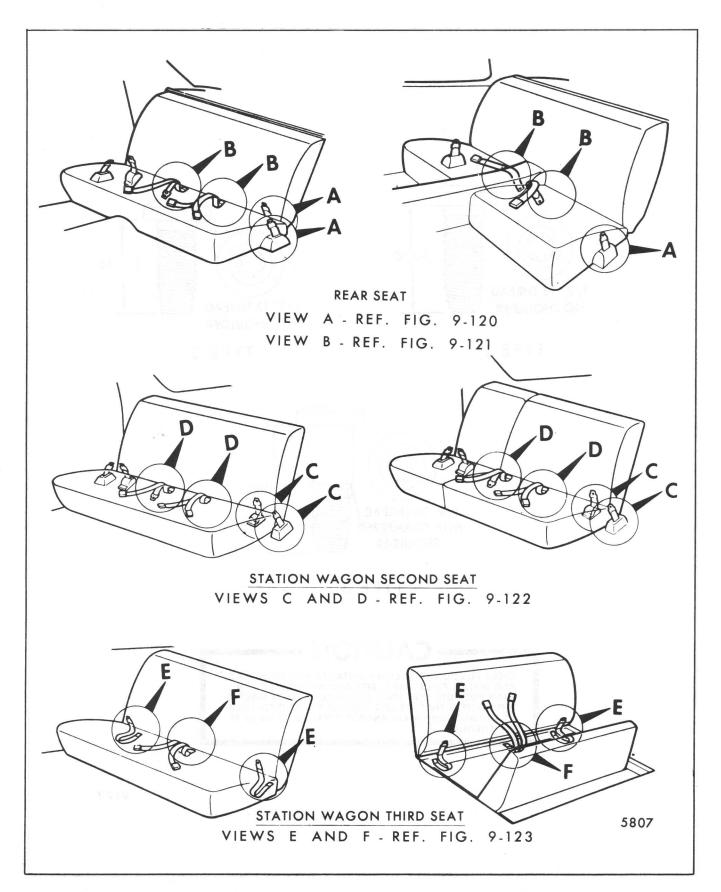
Rear Seat Lap Belt Attaching Locations
